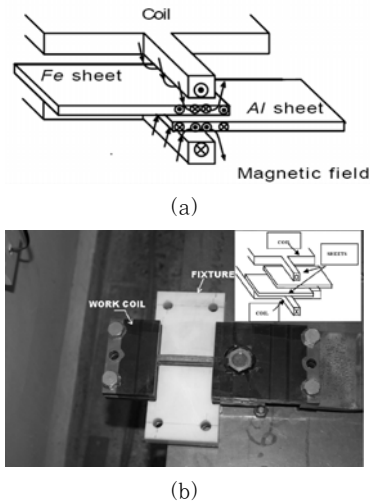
Flat coil structure⁷⁻⁸⁾ (a) Double layer H-shaped flat coil (b) 3D flat rectangular coil
